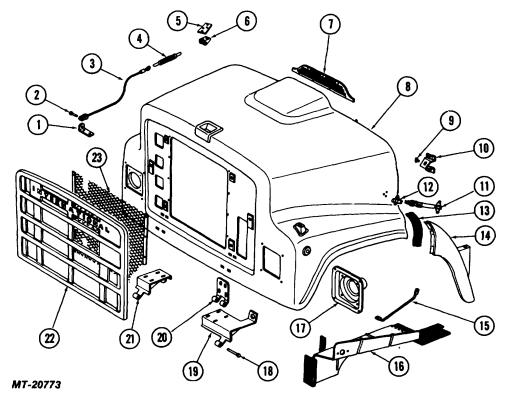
Hood and Hinge Mounting for S-2200 Cab (230 Cm - 90 Inch Wide)
